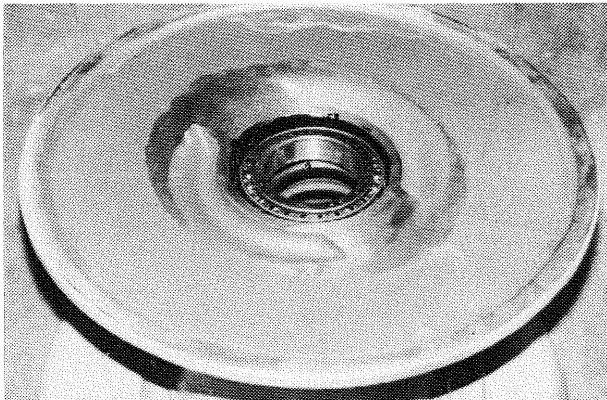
Drum Assembly & Installation (1 of 6)
